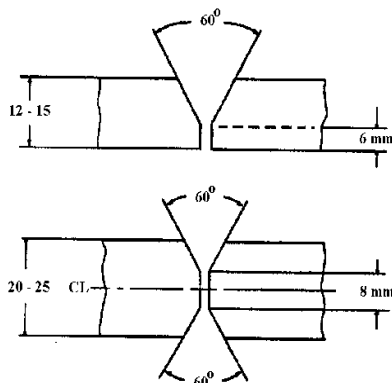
Recommended edge preparation for two-run butt weld test assemblies
